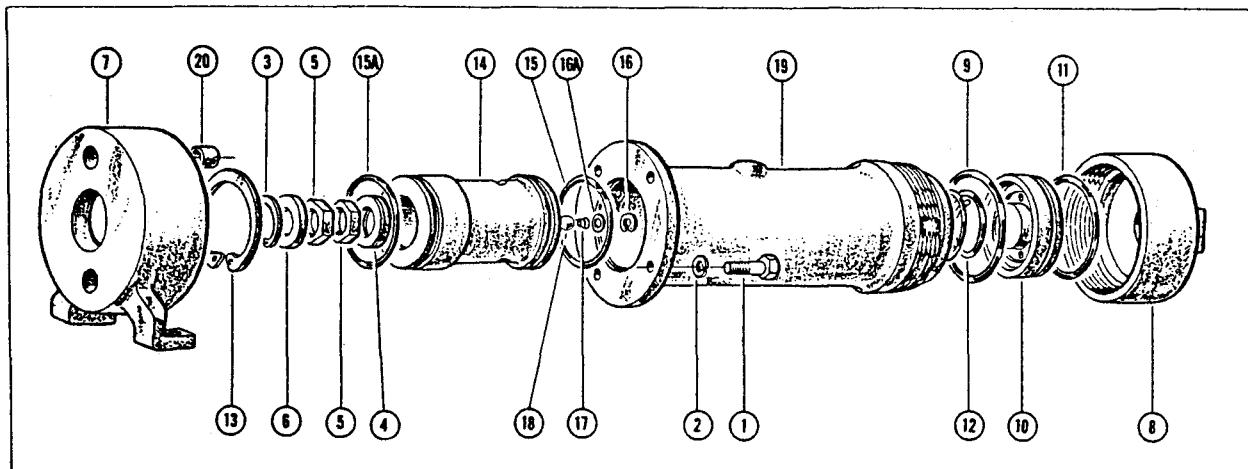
Exploded View, 87-83-1 Master Cylinder Assembly
